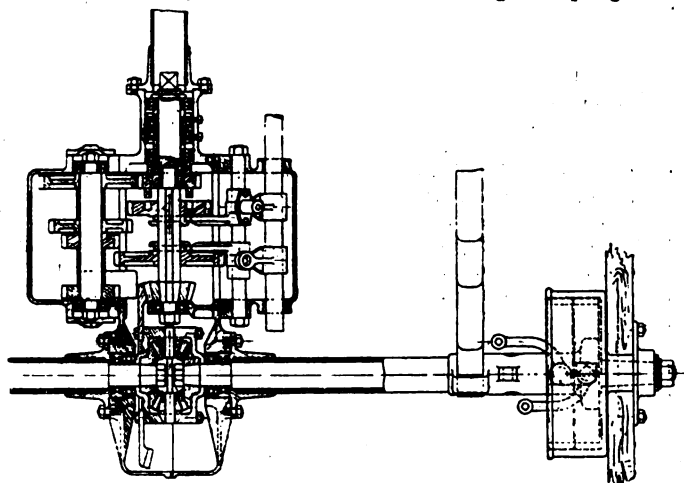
Part Sectional Plan of Gear-Box and Back Axle of S.K. Simplex Car.
